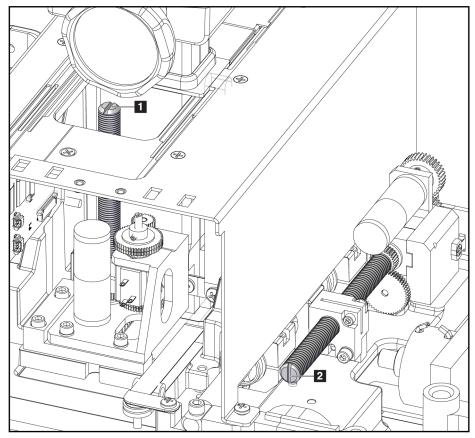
Y-axis assembly drive screw (1), X-axis assembly drive screw (2)
